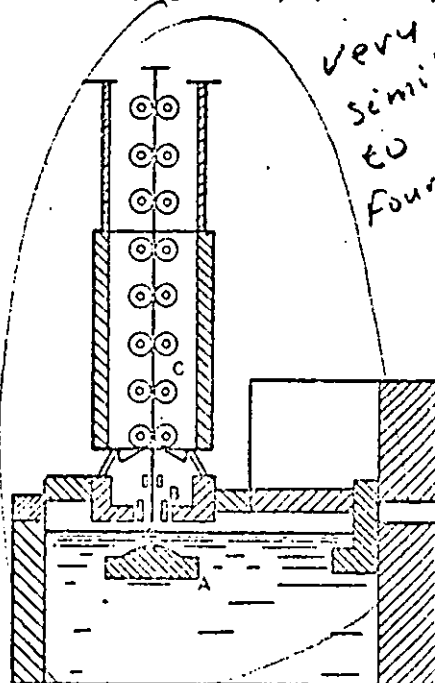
Pittsburgh Plate Glass Company Pennvern process continuous flat sheet drawing machine. A. Submerged draw bar; B. Sheet coolers; C. Vertical drawing machine and lehr.
